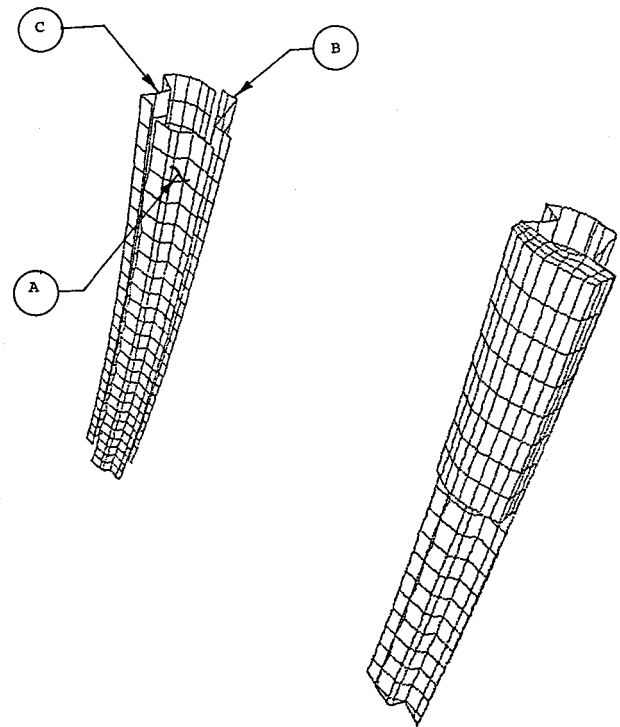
Exploded View of A-Pillar Components and Assembled A-Pillar/Cushion Mesh Model
